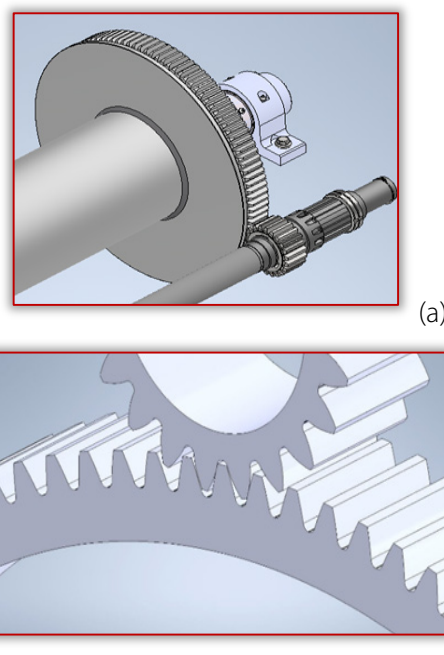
Cylindrical gear drive, a) 22/110 Gears; b) detailed view
